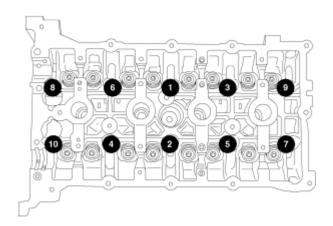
CYLINDER HEAD TORQUE SEQUENCE Courtesy of CHRYSLER LLC
